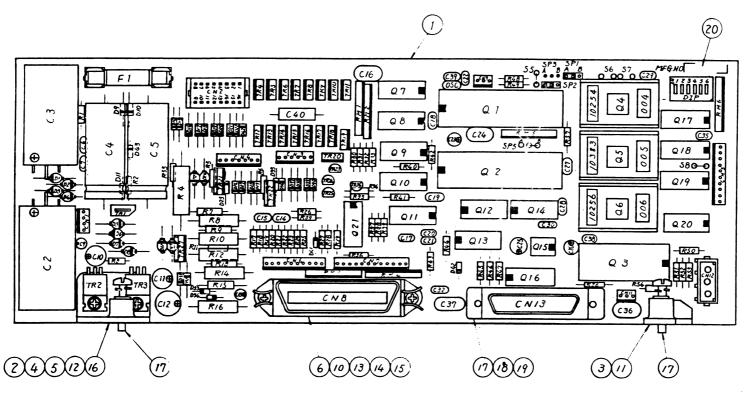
LEPW-2 Circuit Board Assembly (3LX-86727-2) (for 220/240 V)
